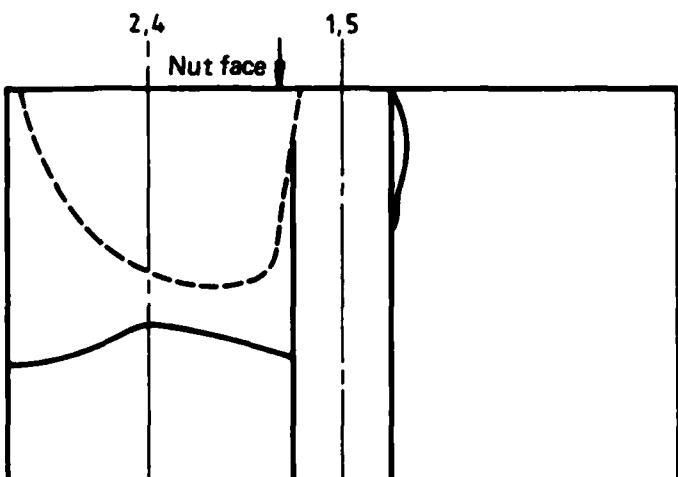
(e) FRACTURE SURFACES: SPECIMEN TYPE (E)
